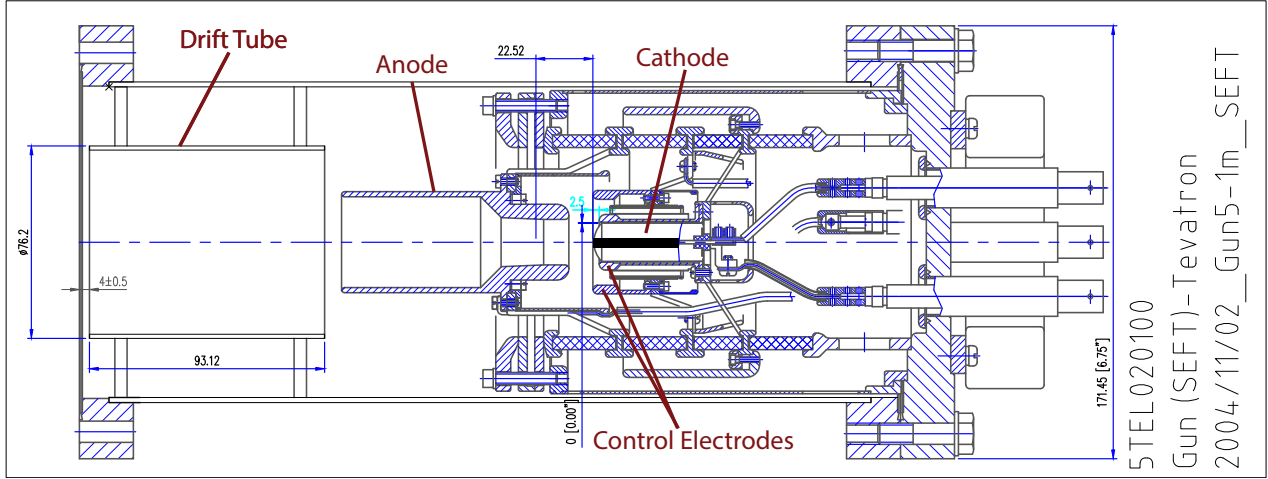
Technical Drawing of HG06. Source: Gennady Kuznetsov (Fermilab)
